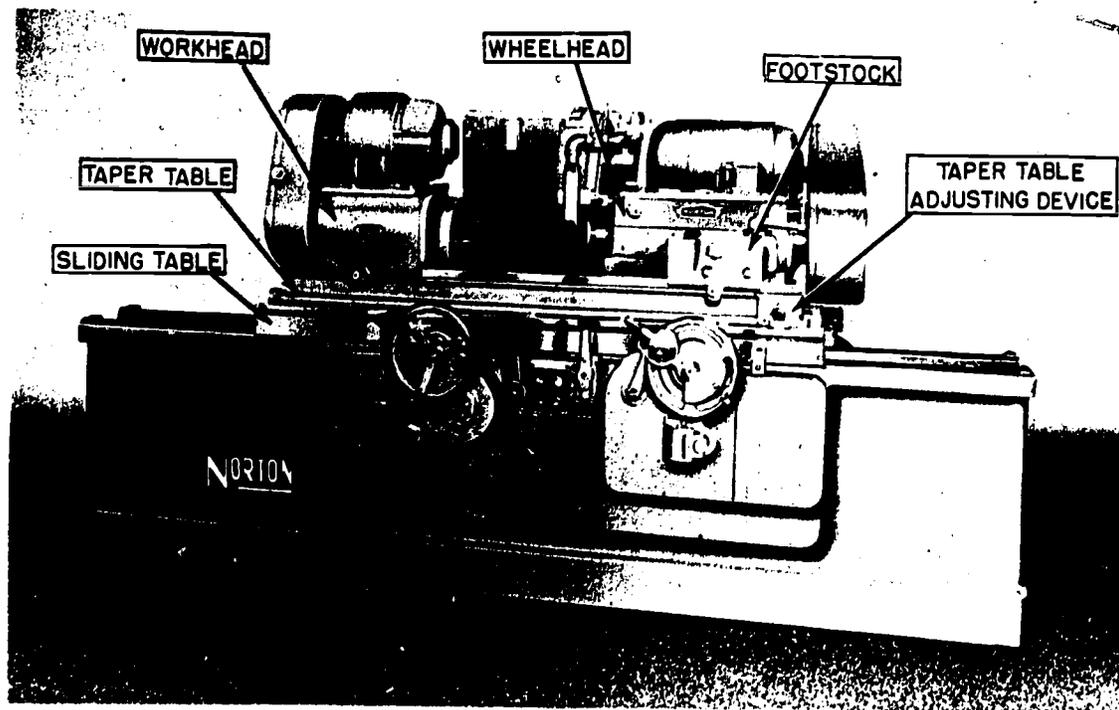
Cylindrical grinder (with workhead and footstock mounted).
